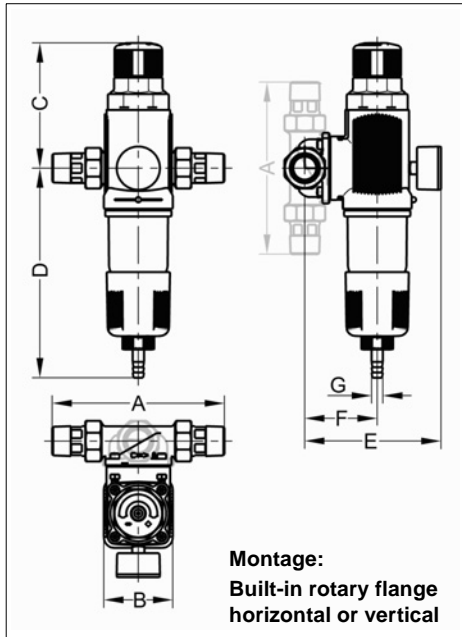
Installation dimensions JEF-BP ¾" - 1¼"
